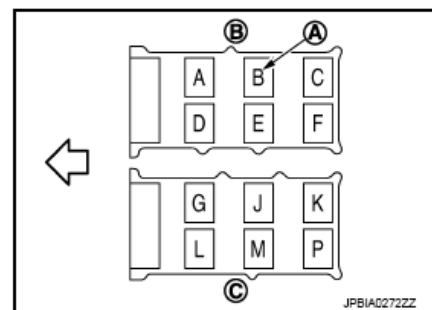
Identifying Camshaft Brackets Stamp Marks
